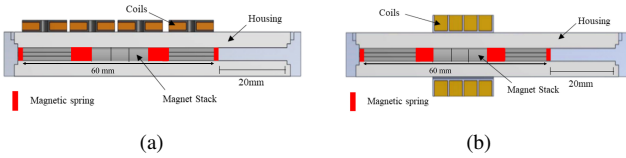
Exploded view of the prototypes (a) Design 1 (b) Design 2.
